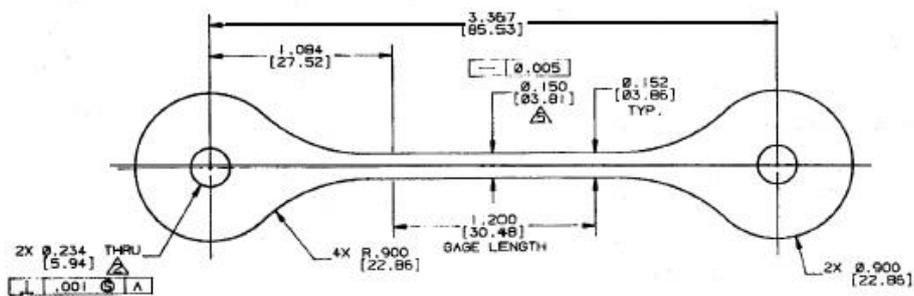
ASTM Tensile specimen drawing for parts produced by metal injection moulding [15]
